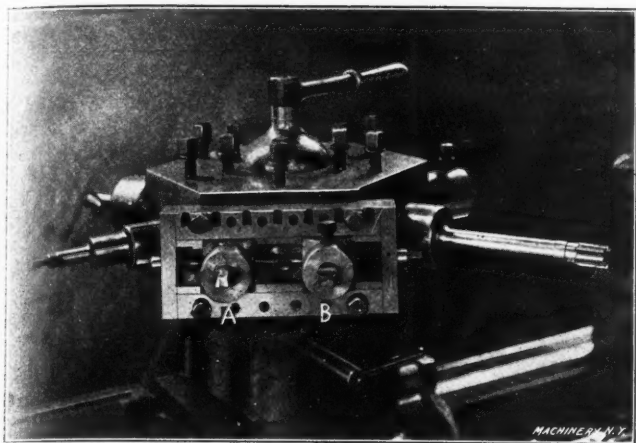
Detail View of Adjustable Tool-holder used for Cutting Circular T-slots
